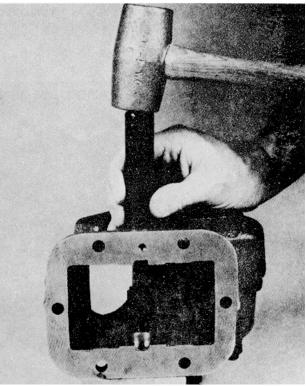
B-24. Installing Idler Shaft NOTE Idler pin groove has to line up with set screw hole.
